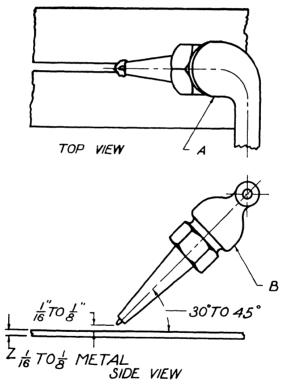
How to hold a torch when flat welding: A. Note the torch points along the direction of welding, B. The angle is less for thin metal and more for the thicker metal
